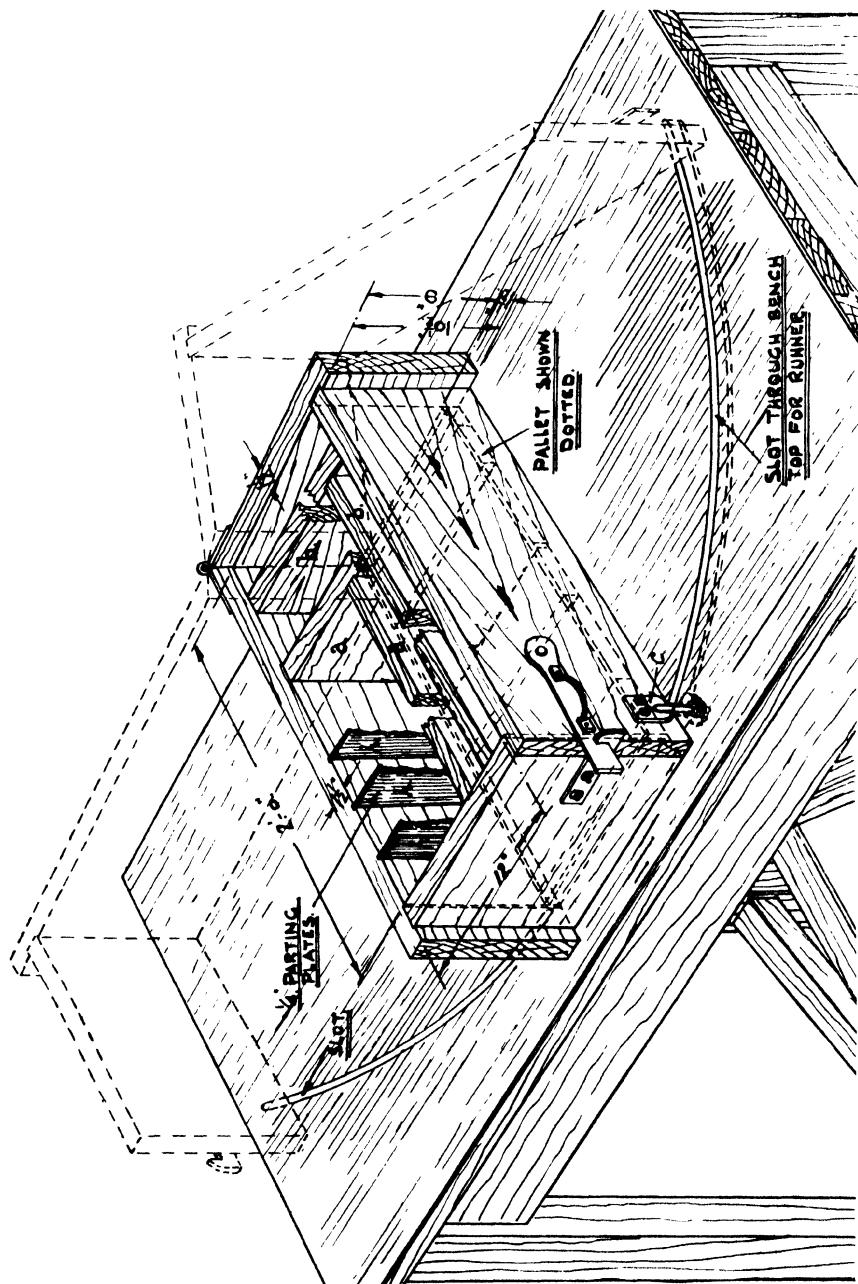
MOULD BOX ASSEMBLED ON BENCH
